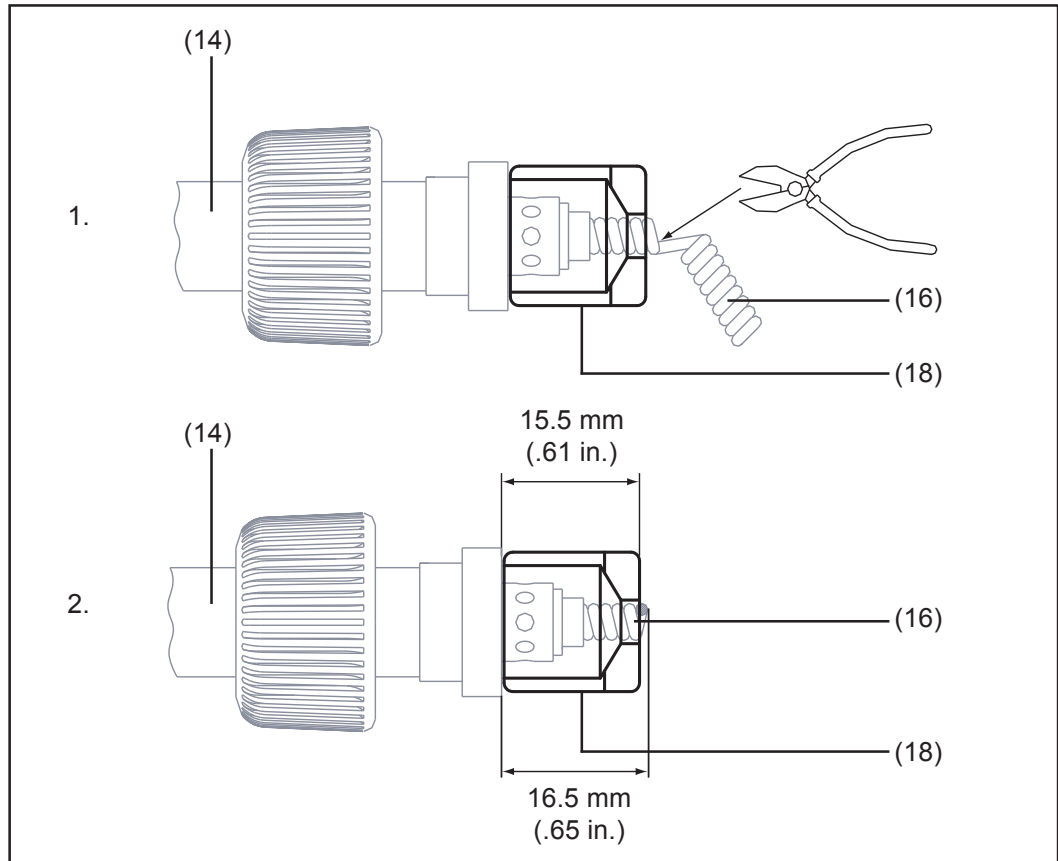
Cutting the inner liner to length using the cutting-to-length sleeve
